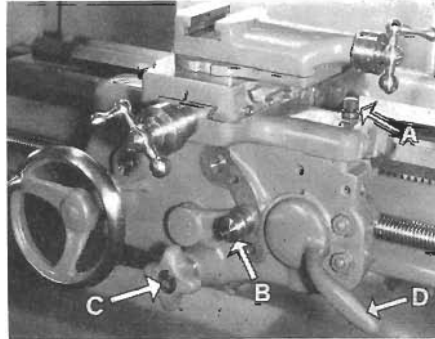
Principal Parts of Lathe Carriage (Models A and B Lathe)
